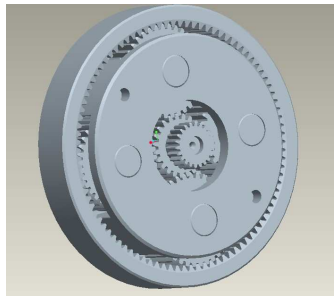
Assembly Drawing of The Planetary Gear Reduction Mechanism
